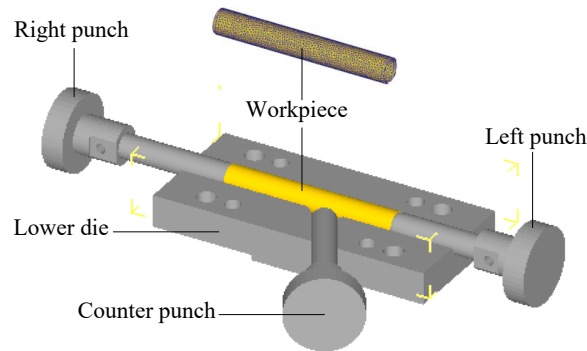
The geometric model of the mold and the Y-shaped tube is designed in Solidworks software, and the workpiece is meshed
